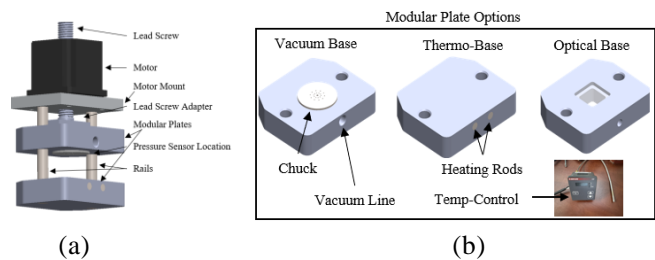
(a): V2 design of the custom imprint tool which incorporates all the specifications listed in Table 1. Figure 5(b): Modular base option for V2 imprint tool design.
